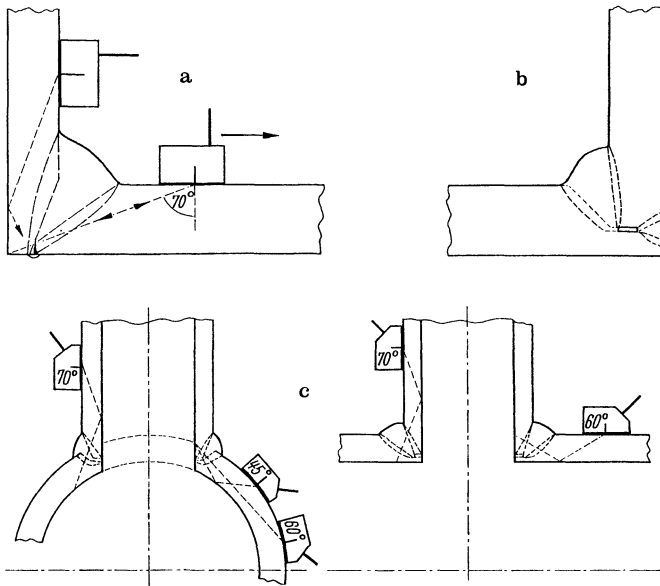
Testing nozzle welds and pipe joints
